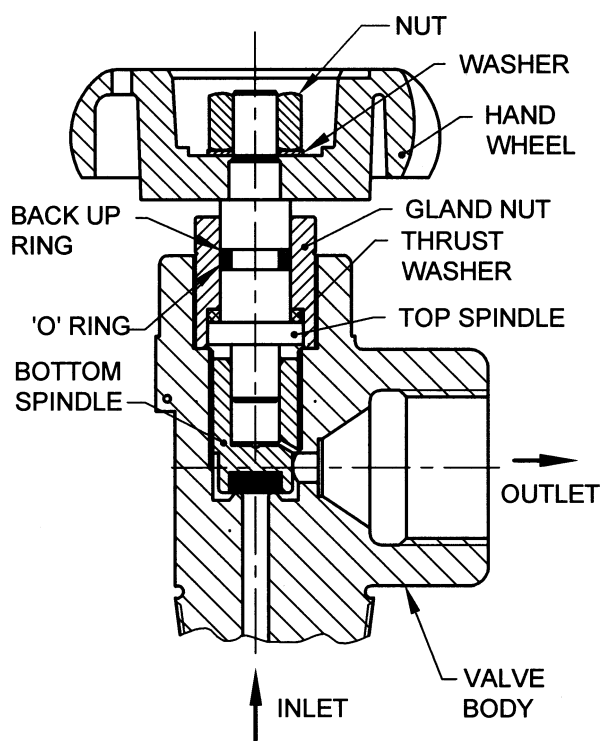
ILLUSTRATION O-RING GLAND SEAL VALVE,
